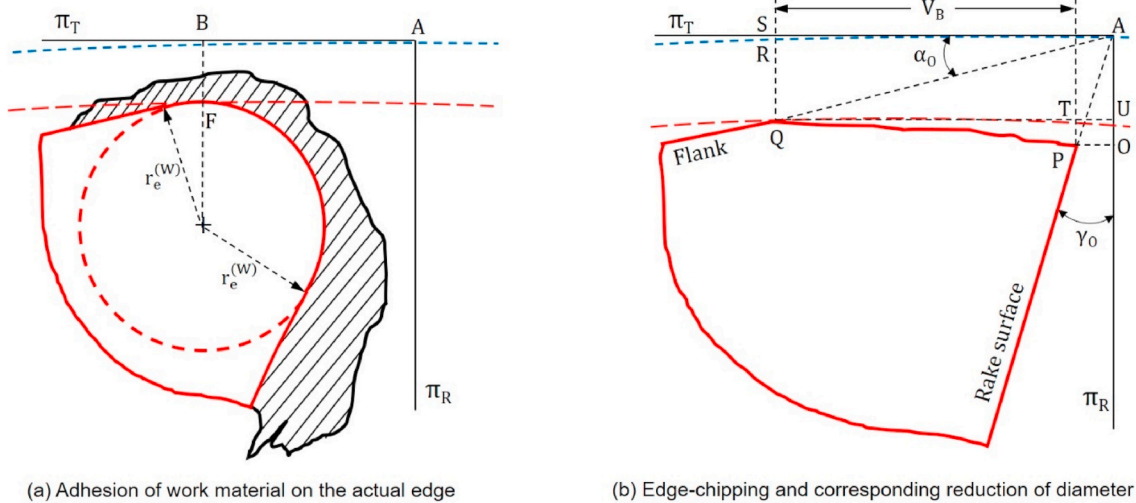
Schematic representation of the cutting edge (a) with adhered workpiece material, and (b) after brittle fracture in the form of micro-chipping.
